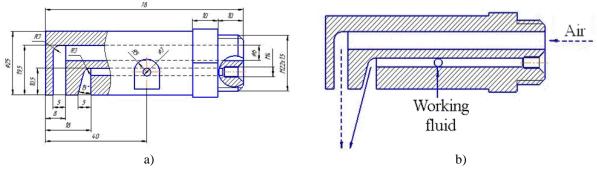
A scheme (a) and cross-section (b) of the pneumatic hydraulic nozzle
